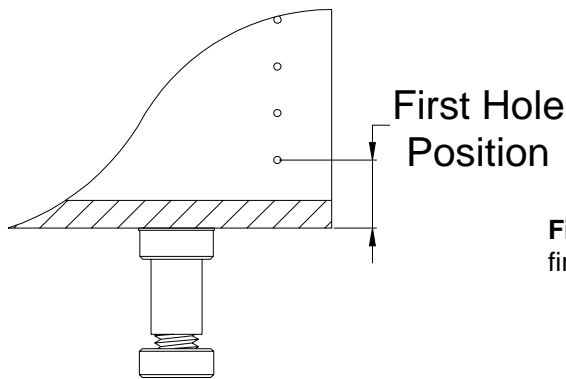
Some commonly used dimensions for the first hole position are 35, 40, 46.5 and 64 mm.
